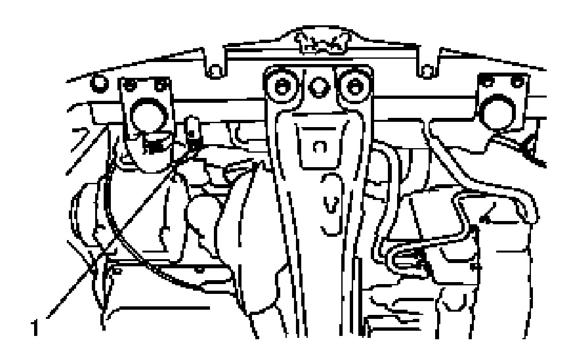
Identifying Radiator Drain Plug Courtesy of SUZUKI OF AMERICA CORP.
